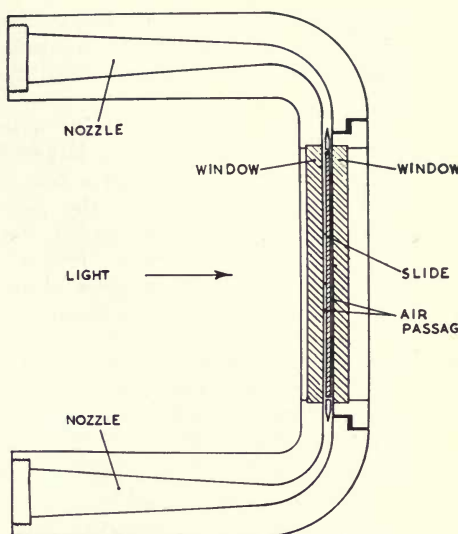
Diagrammatic cross-sectioned view of slide-cooler.
